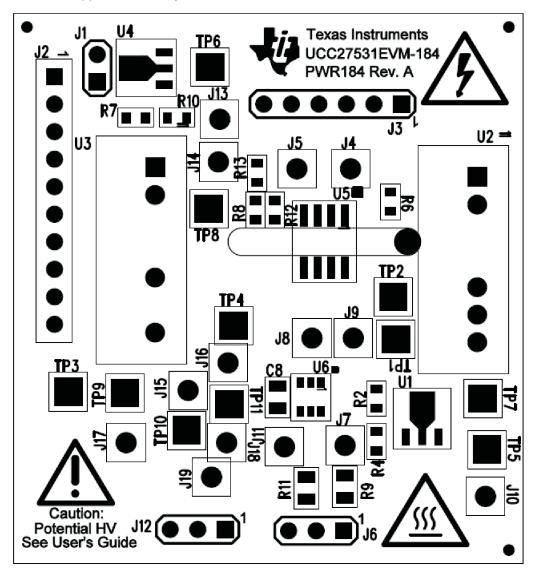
UCC27531EVM-184 Top Layer Assembly Drawing (top view)
